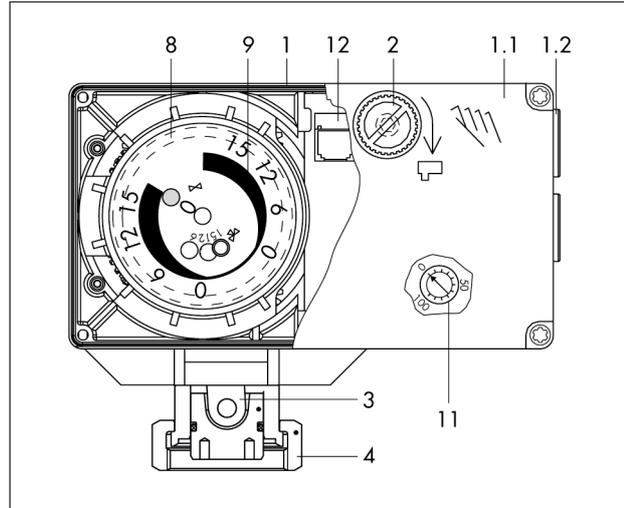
TROVIS 5724-3 Electric Actuator with Process Controller (force-locking attachment)
